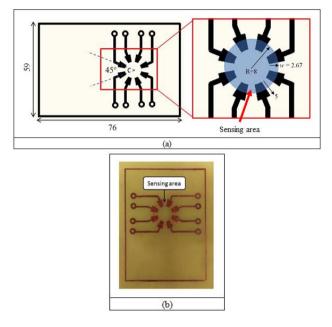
8-planar electrode (a) dimension and arrangement and (b) fabricated electrodes
